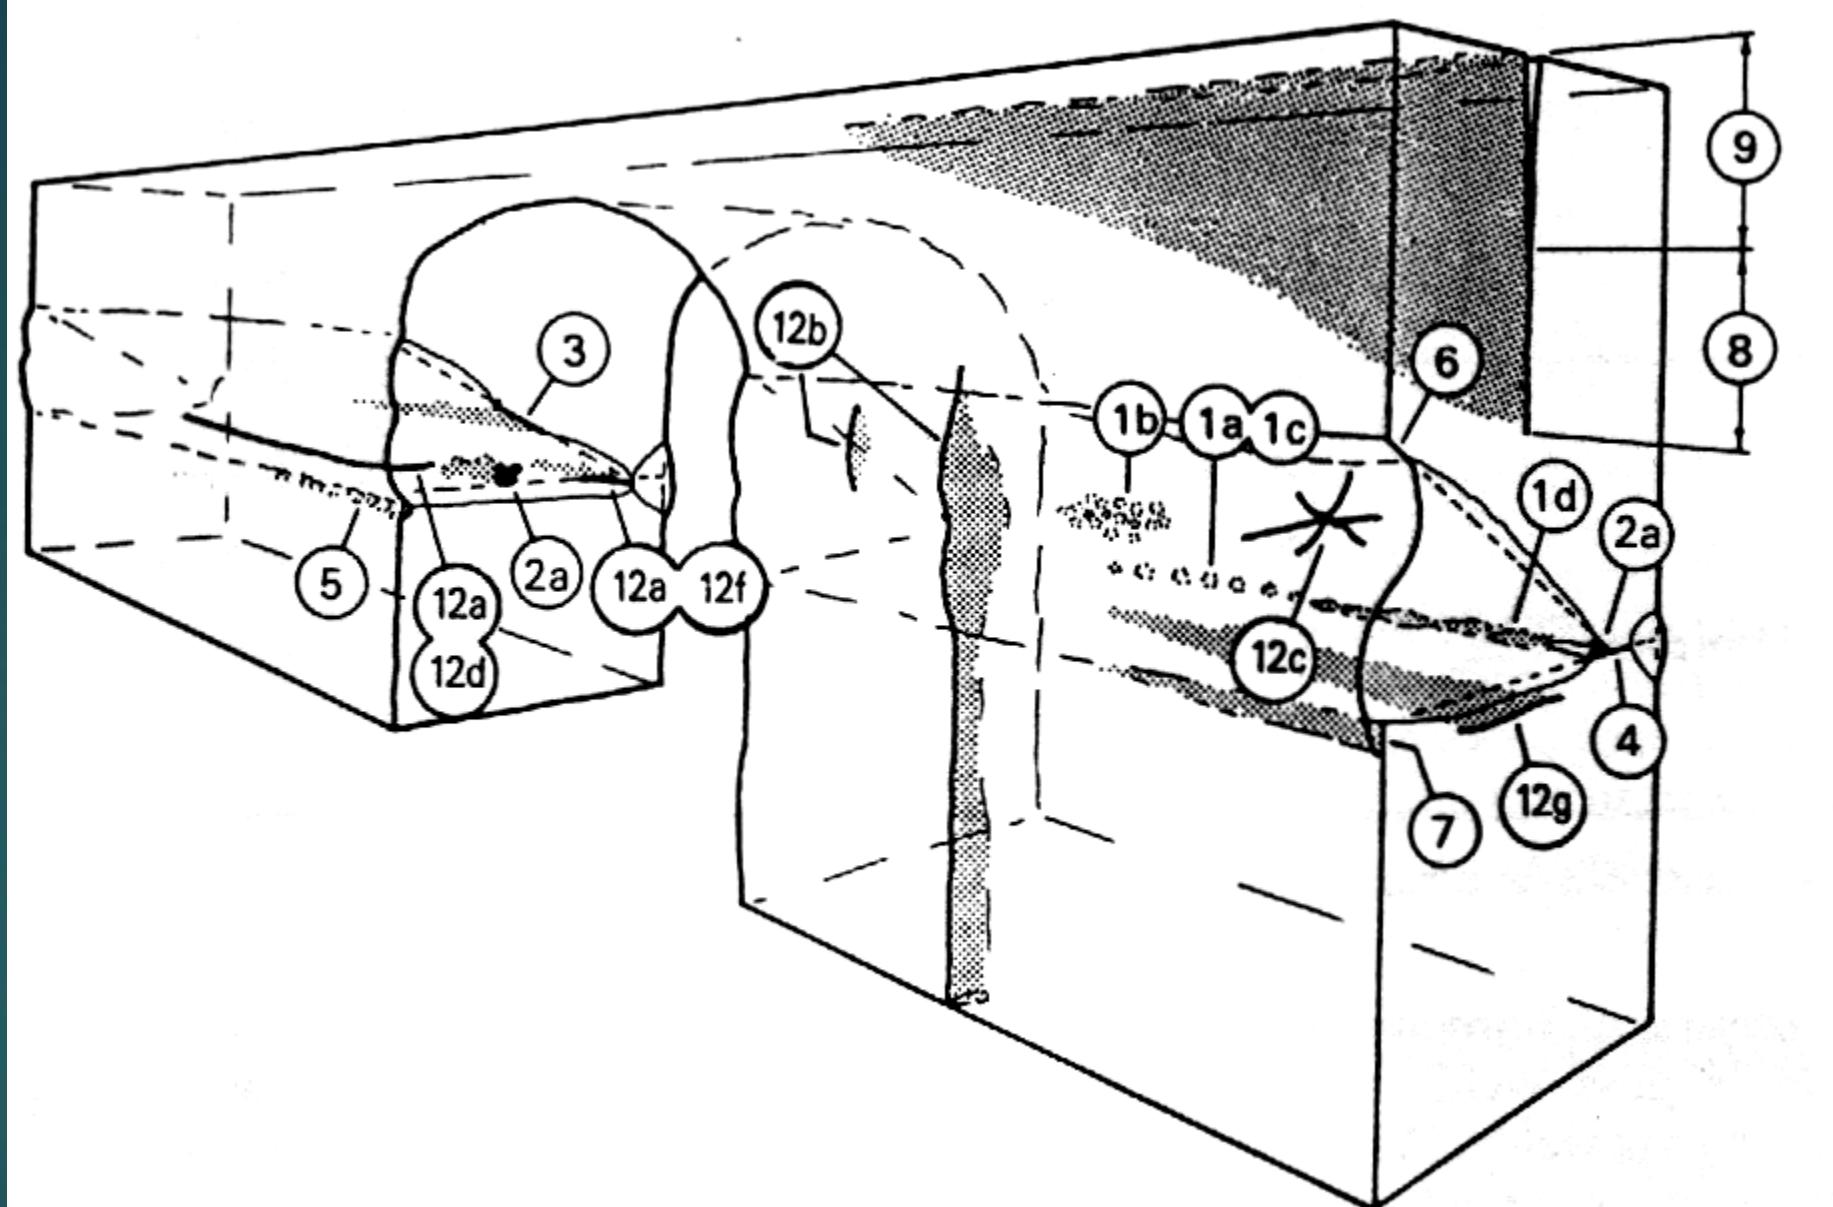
Single-Bevel-Groove Weld in Butt Joint
